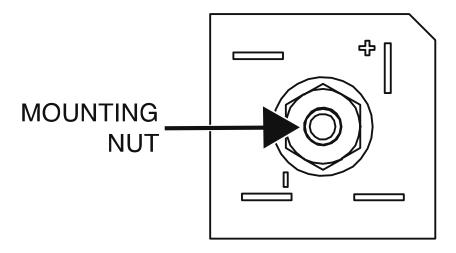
Auxiliary rectifier (D4) mounting nut location
